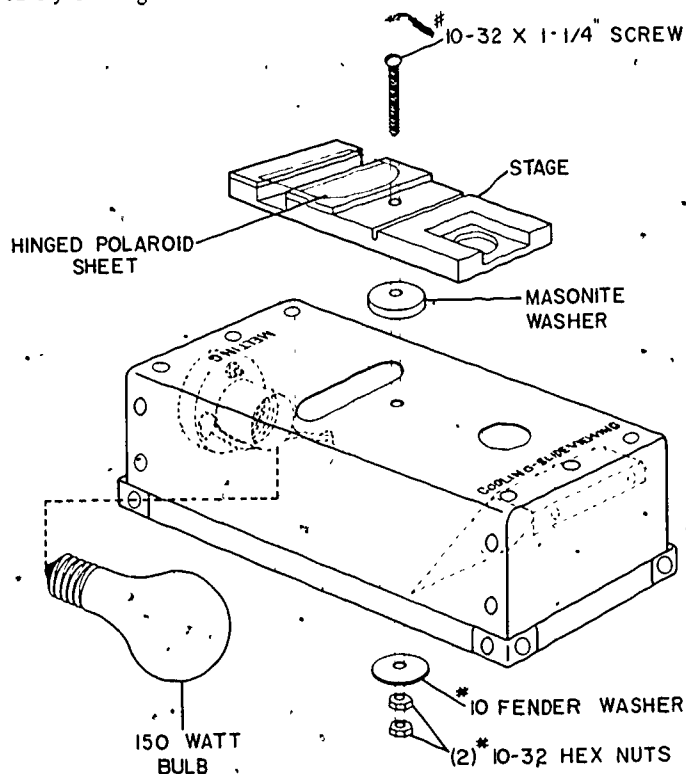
Exploded view of light box with rotating stage and hinged polaroid sheet.
